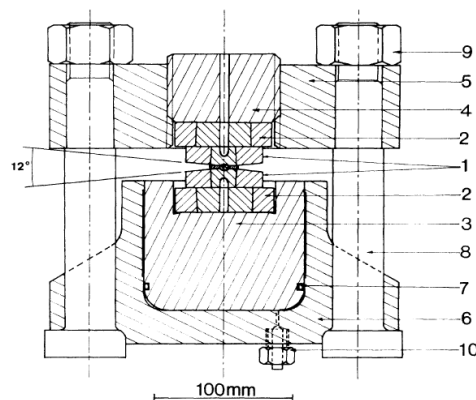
Cross-sectional sketch of the 2.5-MN press. (1) Anvils and sample assembly. (2) Anvil seats and supporting rings. (3) Main piston (35 NCD 16 steel—52 HRC),  $100\text{ cm}^2$  in diameter to provide a  $\sim 2.5$ -MN thrust under 250 MPa oil pressure. (4) Front breech (same material) has two functions: to make assembling of the sample and anvils possible without disassembling the tie rods, and to provide a flat resting surface for the seats by being mechanically decoupled through the thread from the plate (5) which bends outwards under load. (5) Top plate [same steel as (3)]. (6) Hydraulic ram [same material as (3)]. Its unusual shape has been calculated (Ref. 20) to provide compensation of strains and negligible deformation under load at the level of the gasket (7) and of guide ring (top of piston). (7) Neoprene O ring. This is leak tight to well above 200 MPa because the diameter of the oil chamber (6) does not vary under pressure. (8) Tie rods. Marval 18 maraging steel (51 HRC—tensile strength: 1800 MPa). (9) Retaining nuts [same metal as (8)]. (10) Hydraulic oil inlet connected to a 280-MPa pump.
